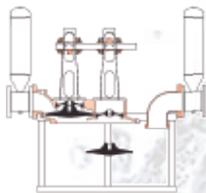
Suction disc removed after removal of suction housing. Easy access given clearance under frame.
